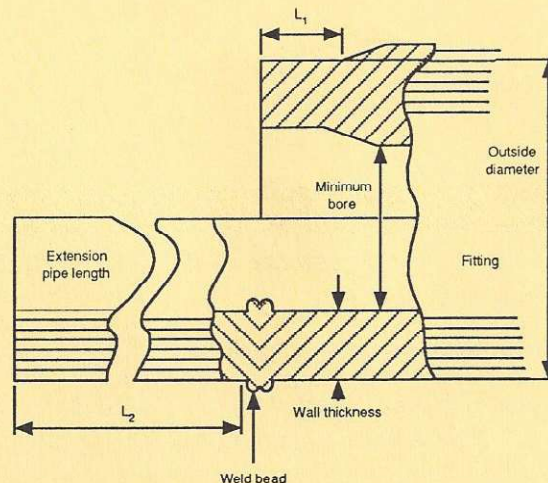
Typical butt fusion fittings plus extension pipe lengths (pups) (location of dimensions)
